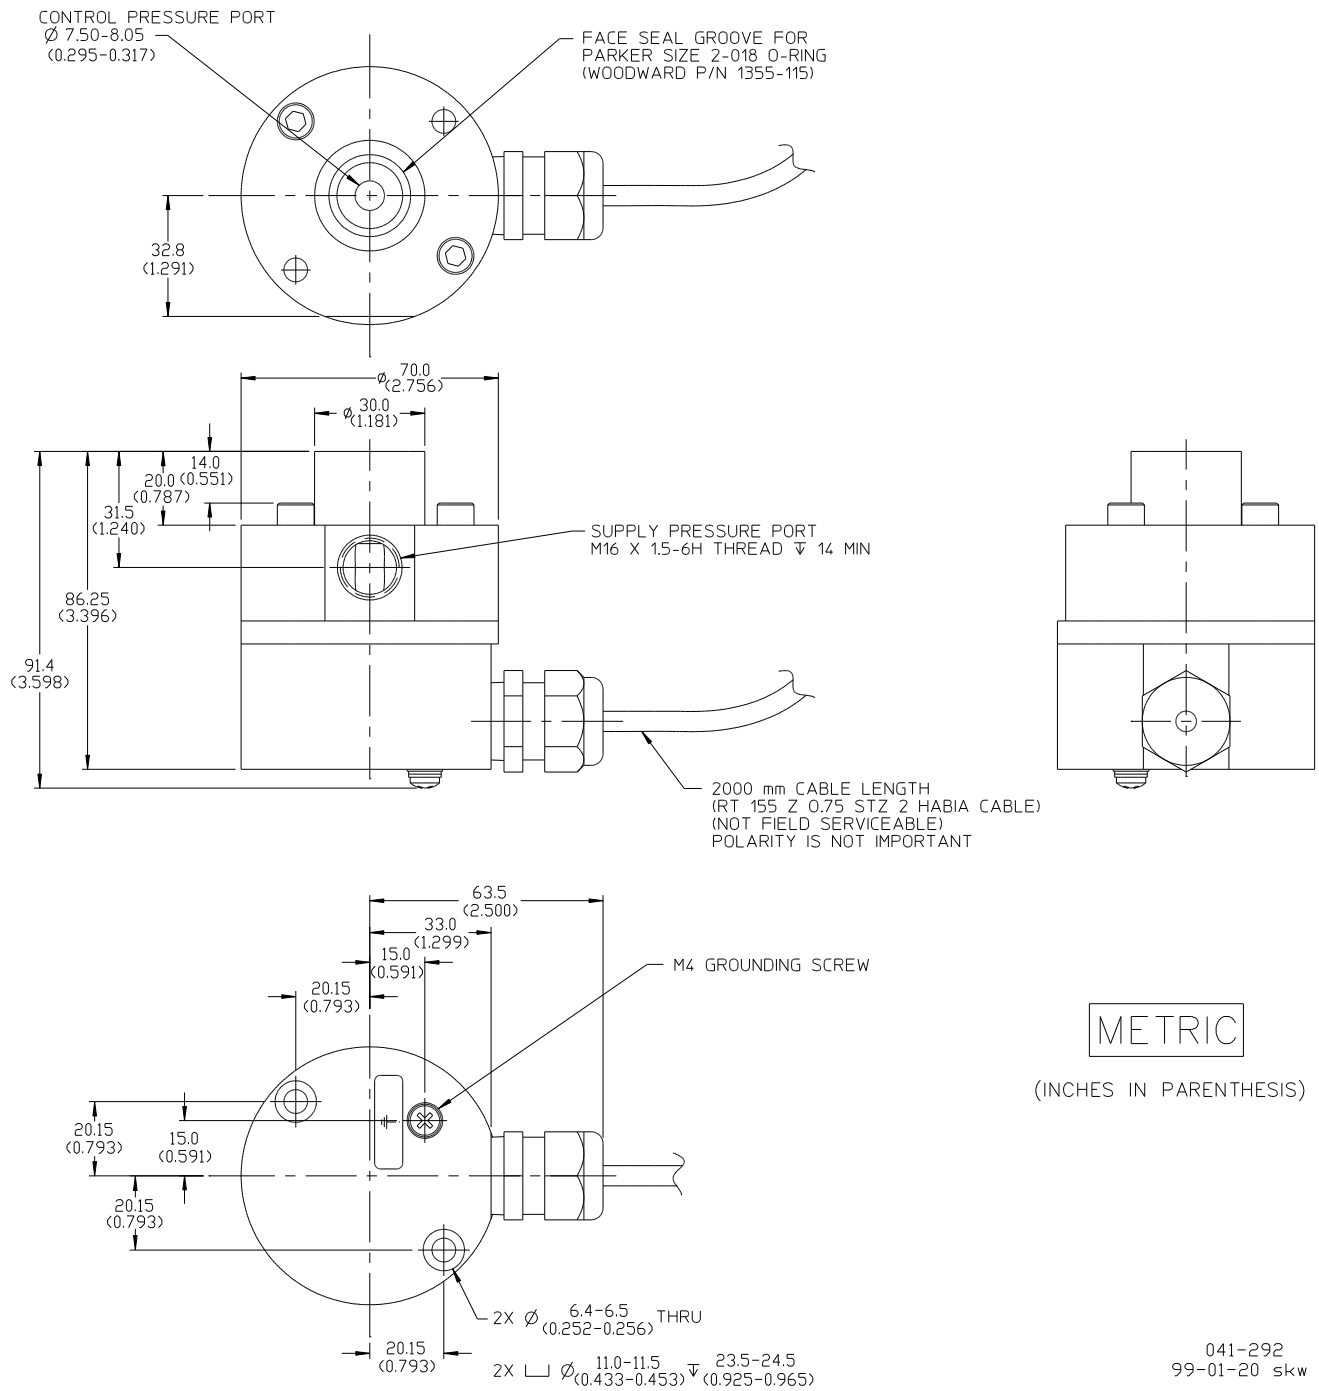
SOGAV 2.2 Outline Drawing (Cable/Gland)
